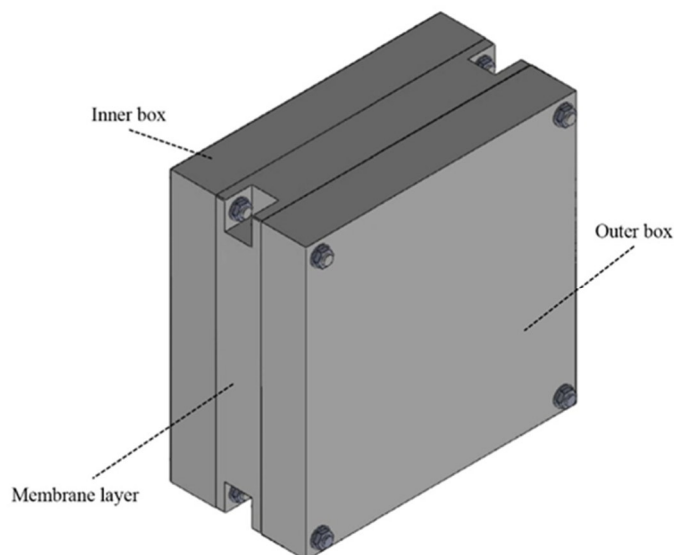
Assembled view of the NIC_20 modular unit with inner and outer steel boxes and membrane
